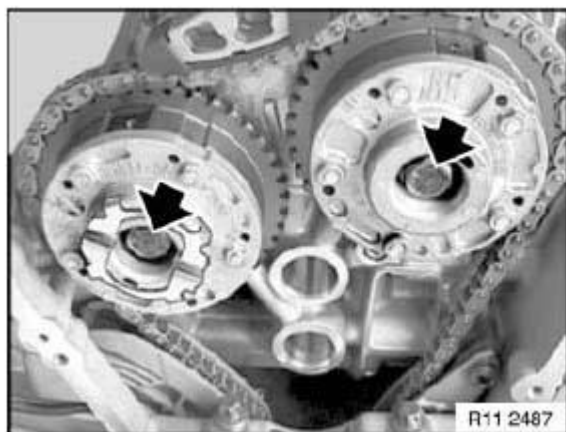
Locating Slacken Screws Of Exhaust And Inlet
